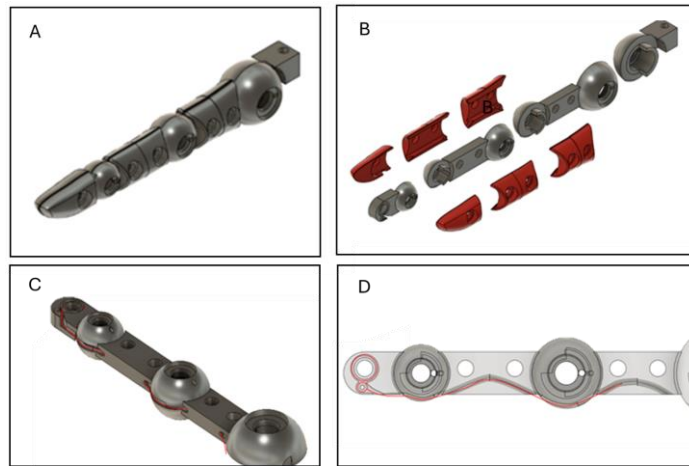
Model A CAD (A) three plane view (B) components (C) string path (external view) (D) string path (internal view).
